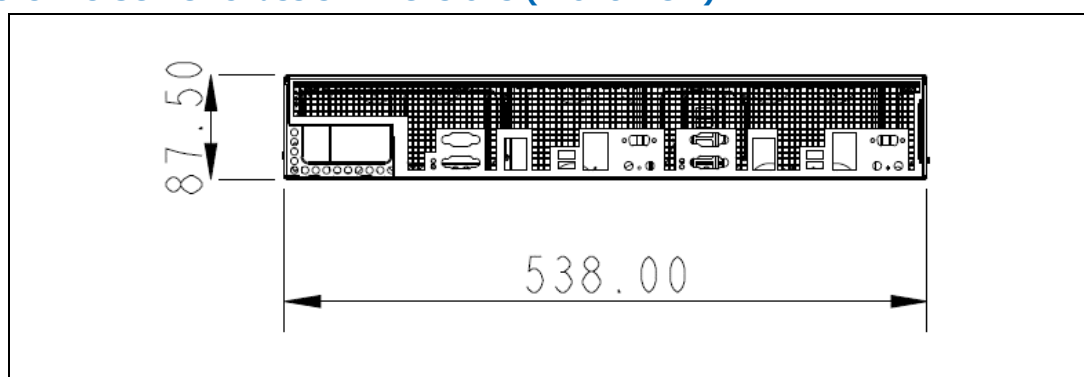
2U Server Chassis Dimensions (Front View)
